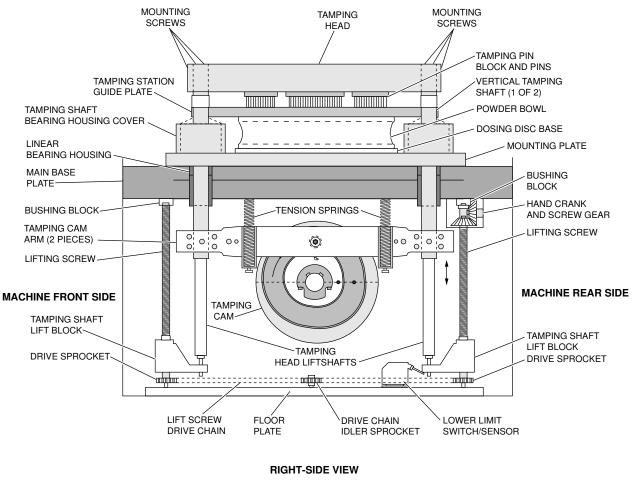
Tamping Head and Pins, Powder Bowl, and Dosing Area Parts
